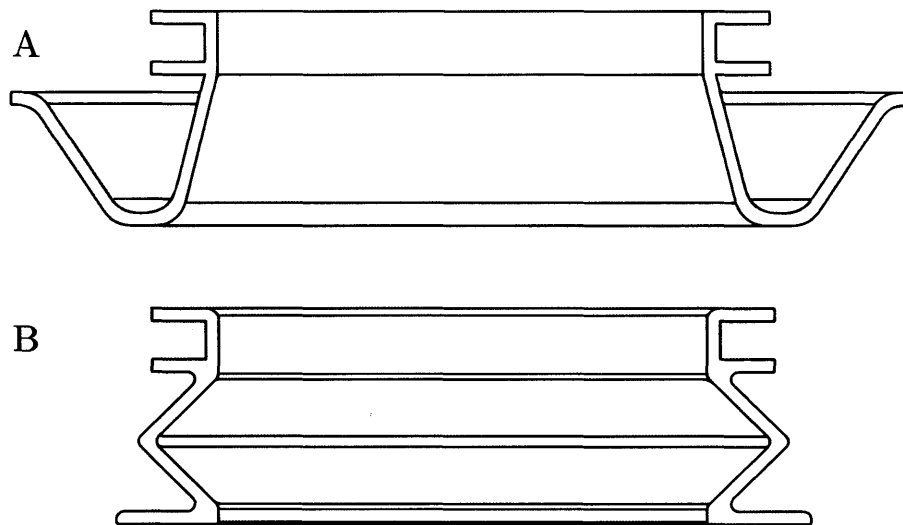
Cross-sections of tested seal geometries: (A) U-shaped seal, and (B) Bellows shaped seal
